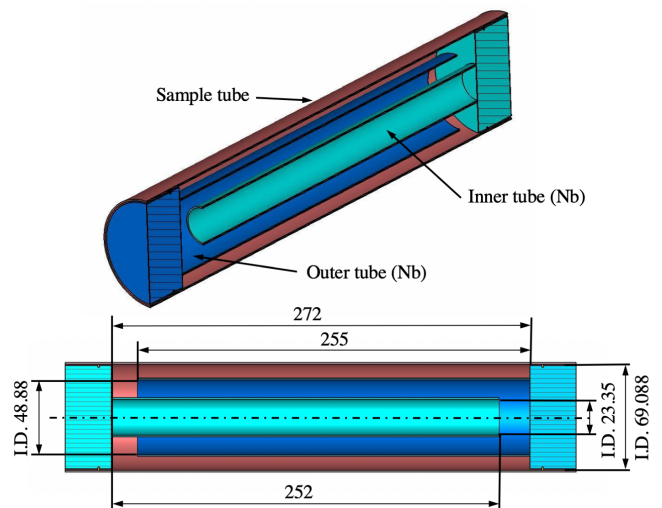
The folded coaxial resonator: [top] cross section of perspective view identifying the main parts and materials, and [bottom] cross section of side view with main dimensions in mm.
